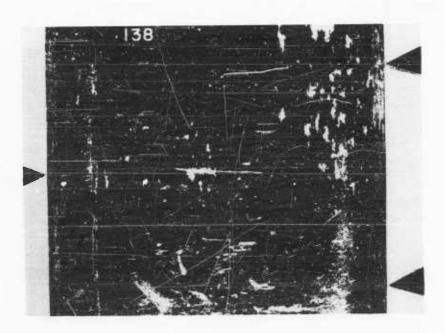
FAILURE IN SPECIMEN NO. 138
